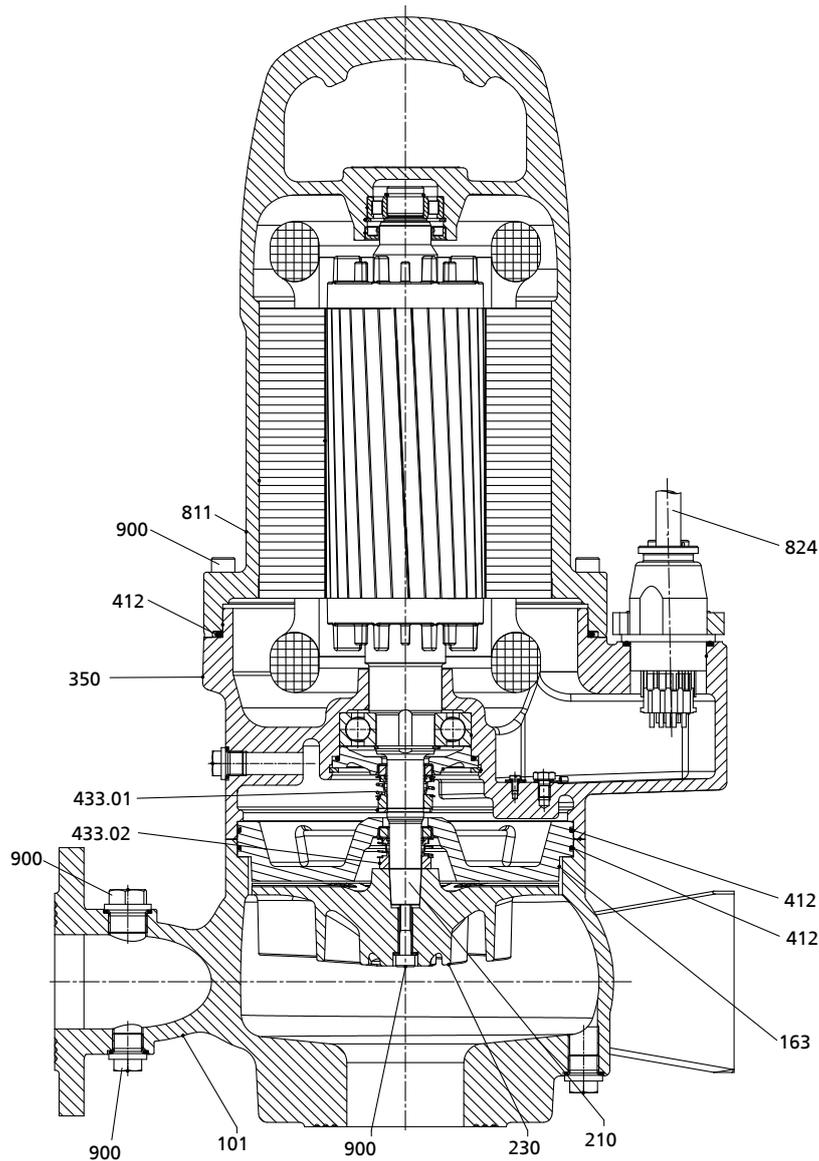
General assembly drawing, example: Amarex KRT F 65-215
